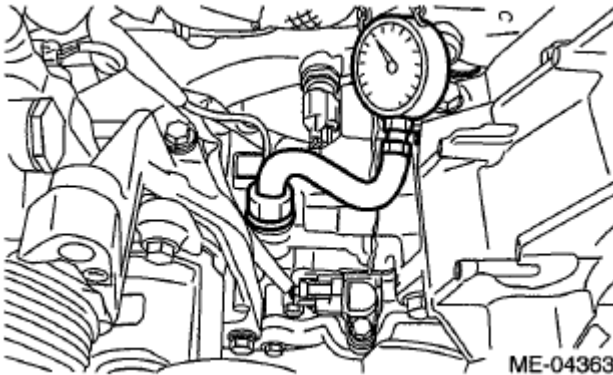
Installing Oil Pressure Gauge To Cylinder Block
